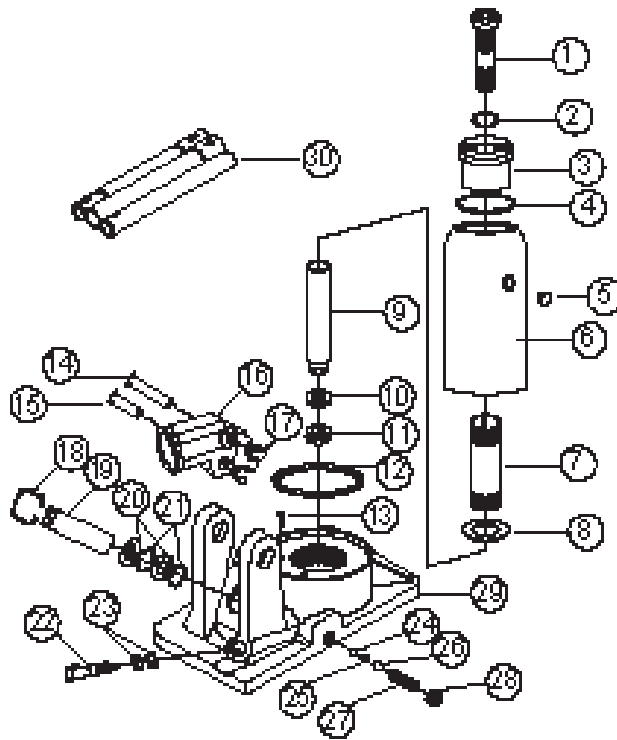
Parts Illustration for Wheel Dolly HW93765 - Hydraulic Unit
